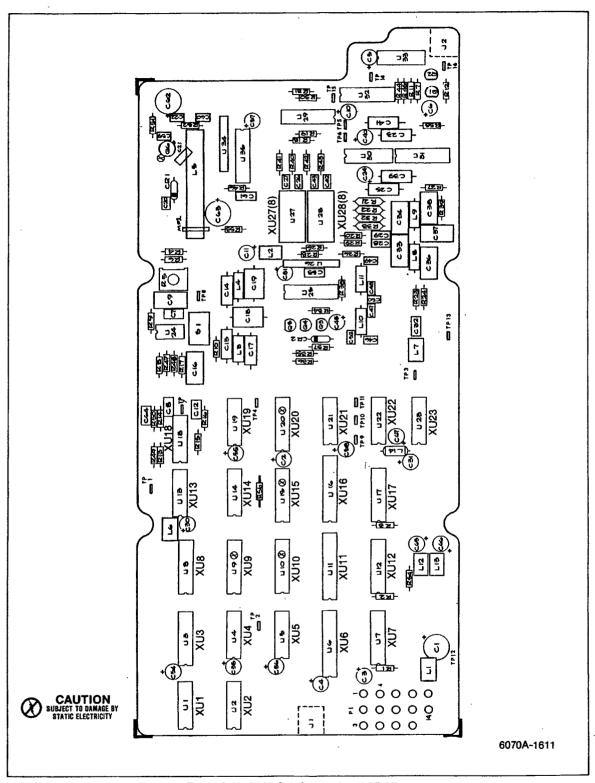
A3A7 Sub Synthesizer PCB Mixer
